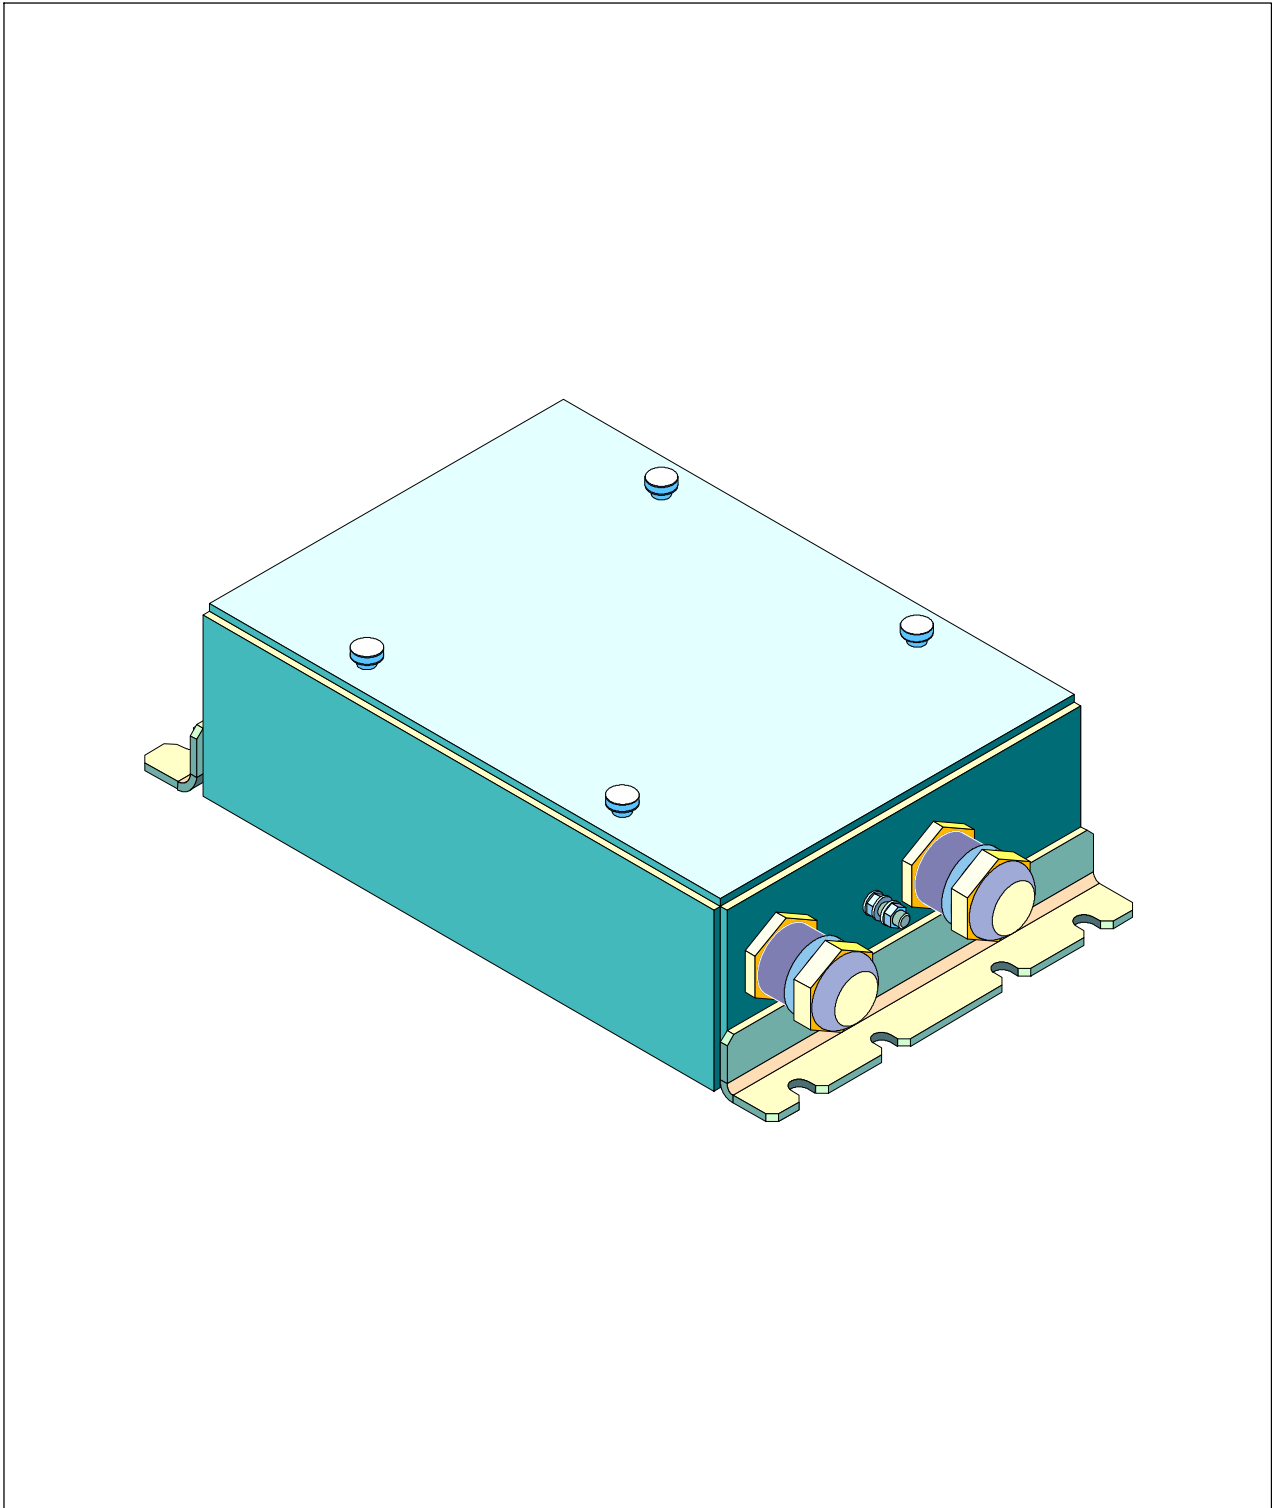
S12000 Outdoor BTS: -48 V connection box
